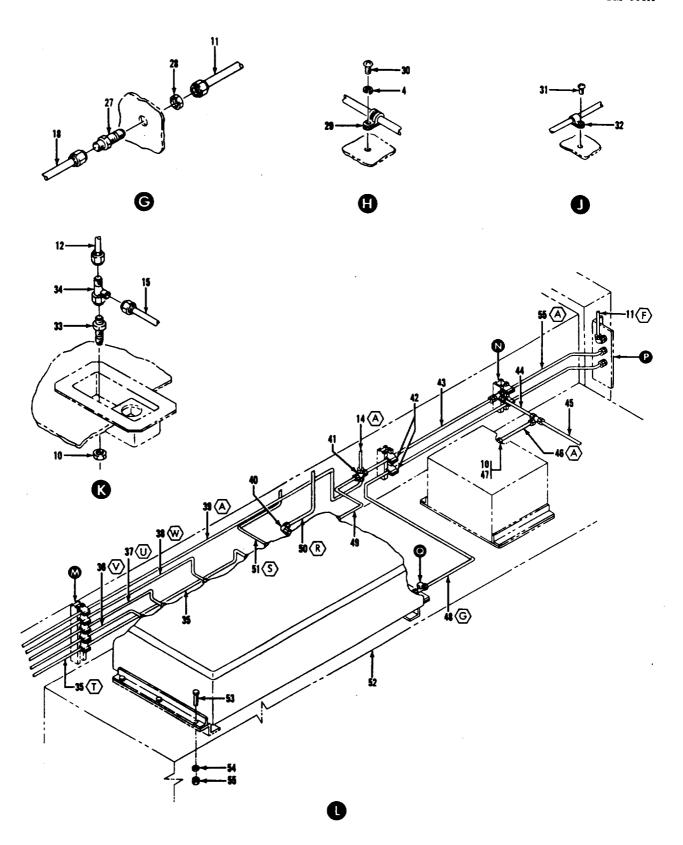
Tubing Installation (Sheet 4 of 17)
